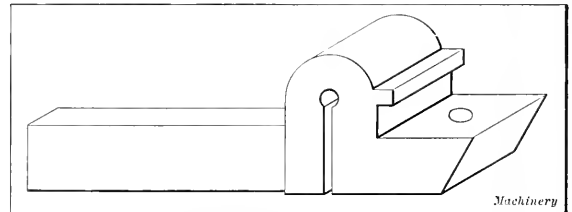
Gooseneck Tool-holder on which Former is mounted for machining Formed Cutters
